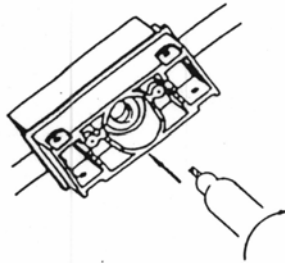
Drilling a Conductor Probe Hole in a Coaxial Cable
